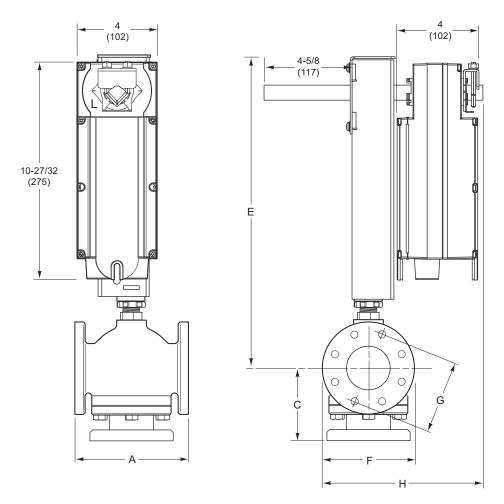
Mx40-717x-2xx with 2-1/2" to 4" 3-Way Flanged Globe Valve With AV-607-1 Linkage.
